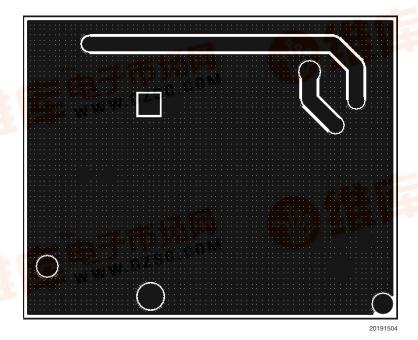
LM3489 Demonstration Board PCB Bottom Layer Layout
